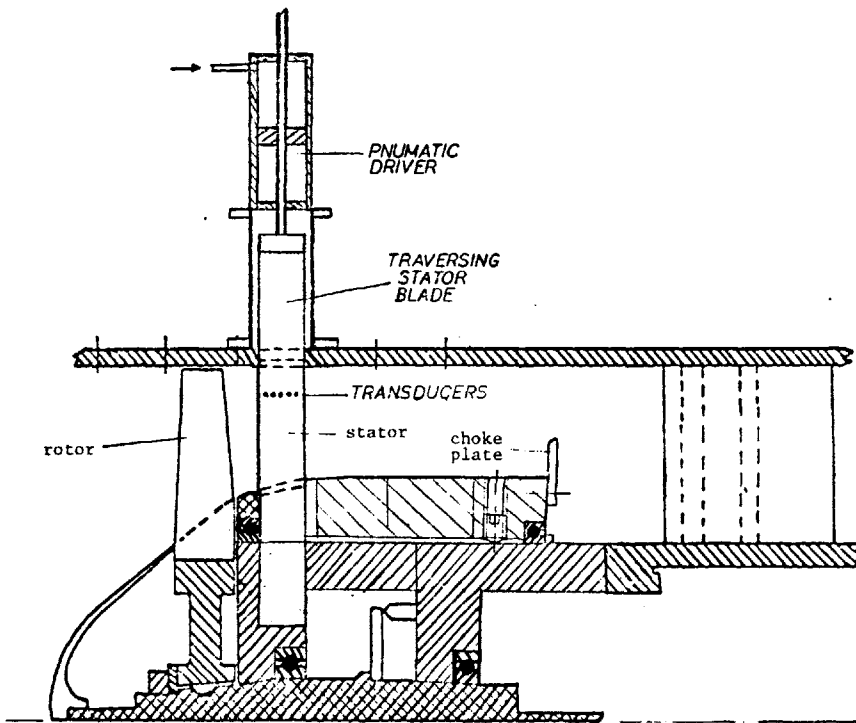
Sectional View of the Test Section with Traversing Blade Installed
